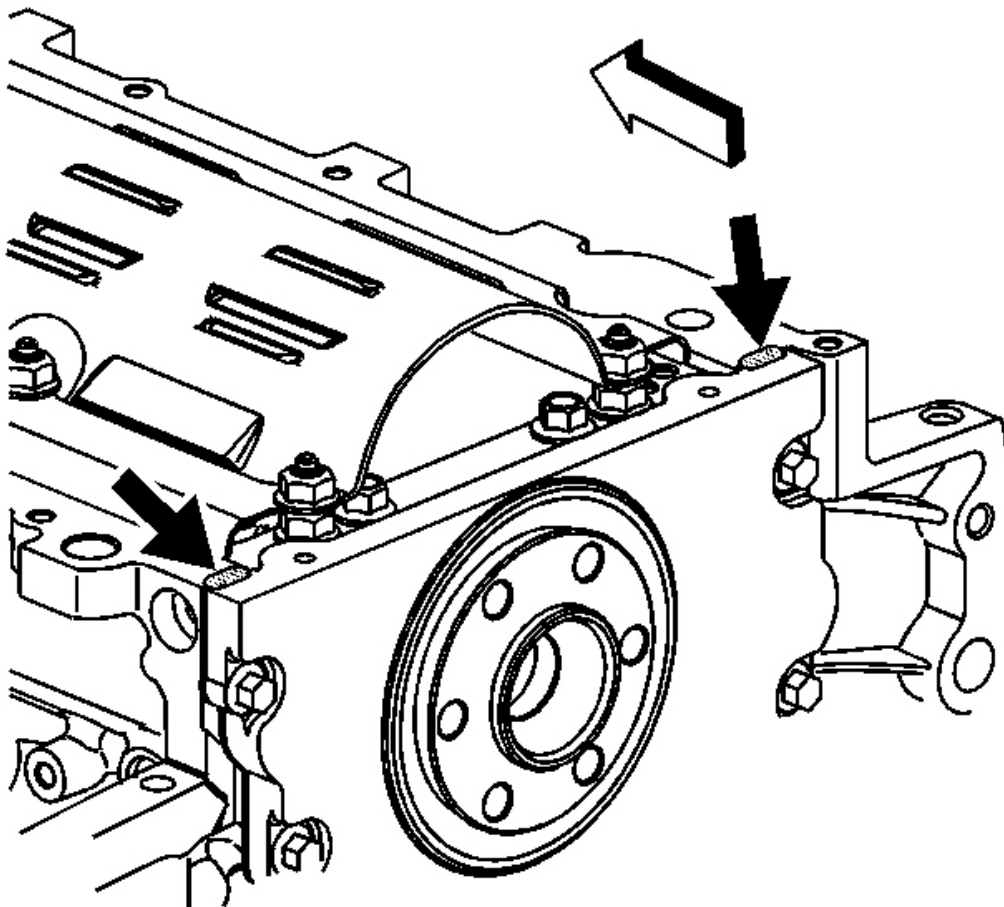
View Of Sealant On Engine Rear Cover Gasket Tabs
